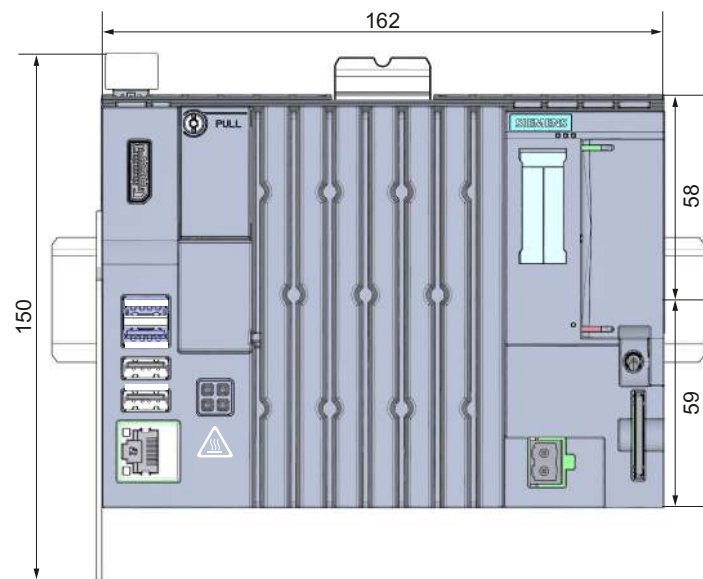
Dimension drawing CPU 1515SP PC2, front view
